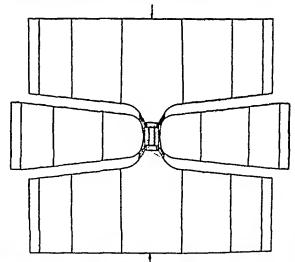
The belt', ultra-high-pressure, high-temperature assembly
